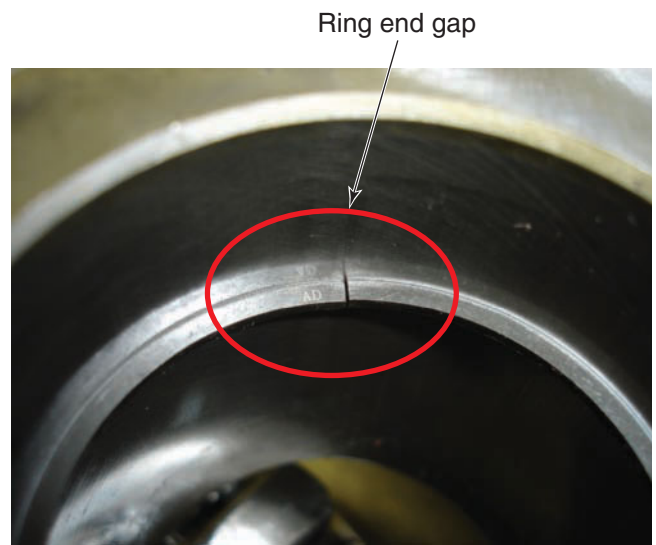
A close-up of piston ring end gap, which is measured with a feeler gauge.
